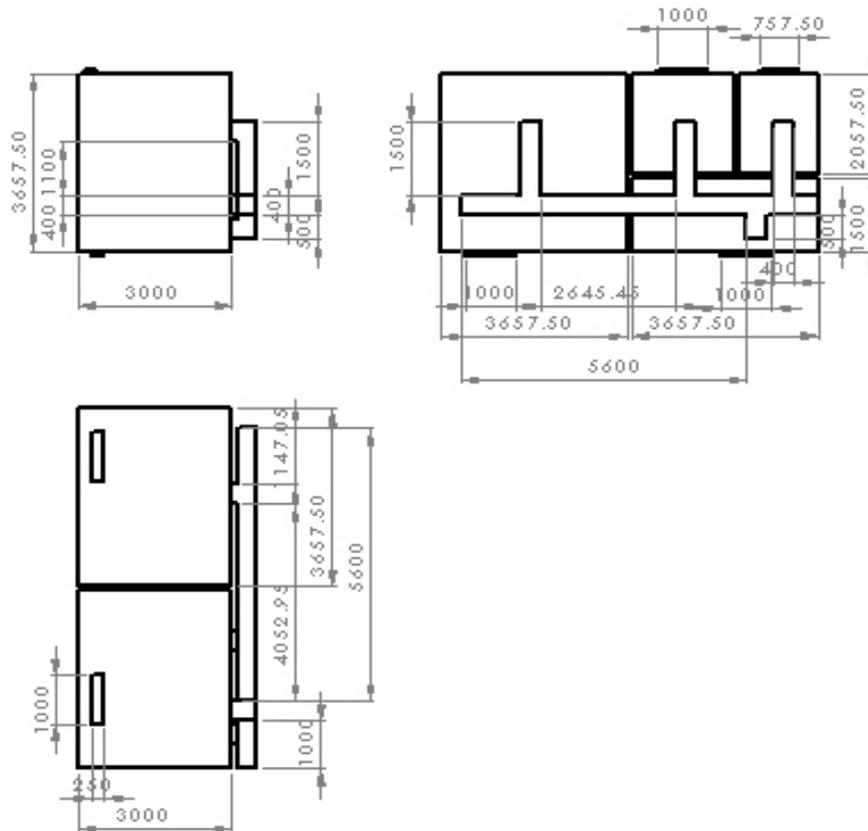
Two dimensional view of model with 2 and 4 inlets in the cabin
